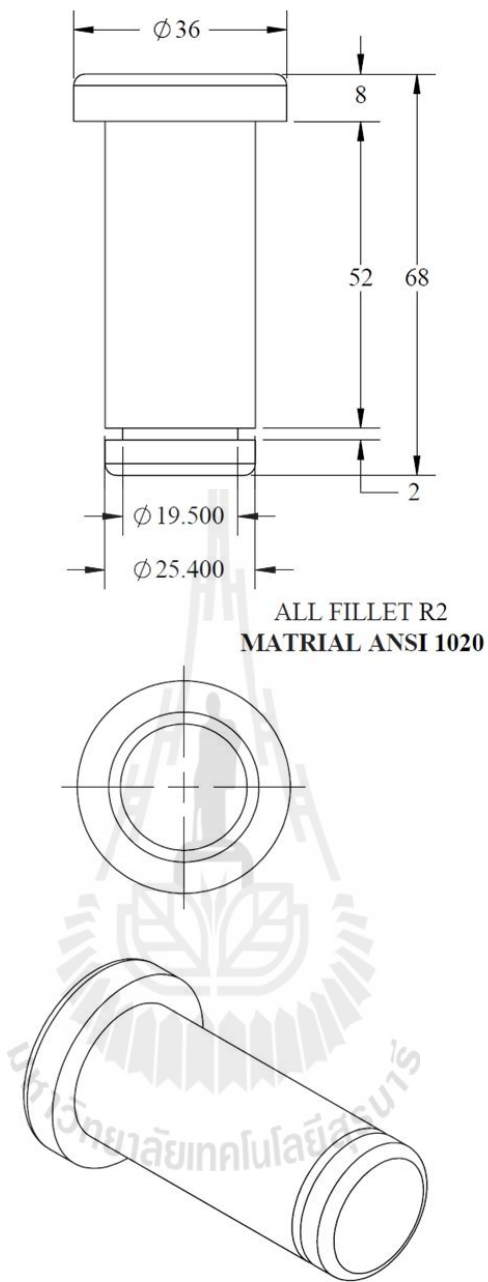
Dimensions of steel hinge (1) in millimeter scale.
